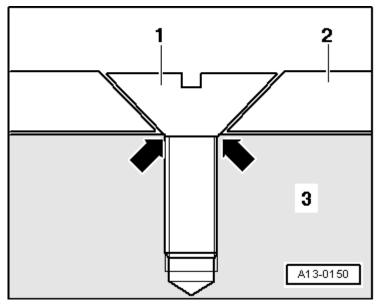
Identifying Attachment Points, Countersunk Screws, Crankshaft & Sensor Wheel Courtesy of AUDI OF AMERICA, LLC
